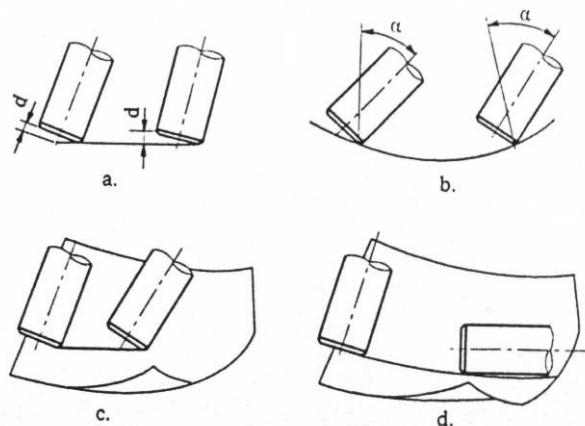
b. Milling geometry for 5-axes milling with frontal mill: a - constant d distance; b - constant α angle; c - maximum tool-part contact; d - NC rolling (flank processing).
